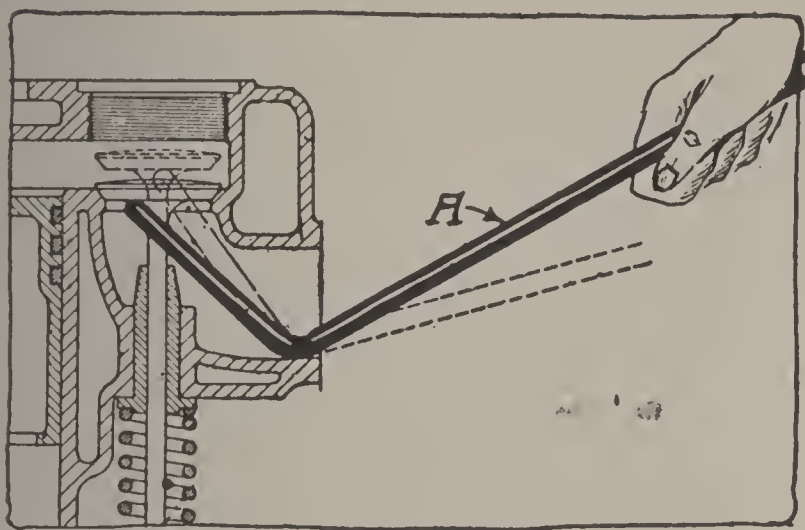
Bent Tool Which Facilitates Removal of Stuck Valves
